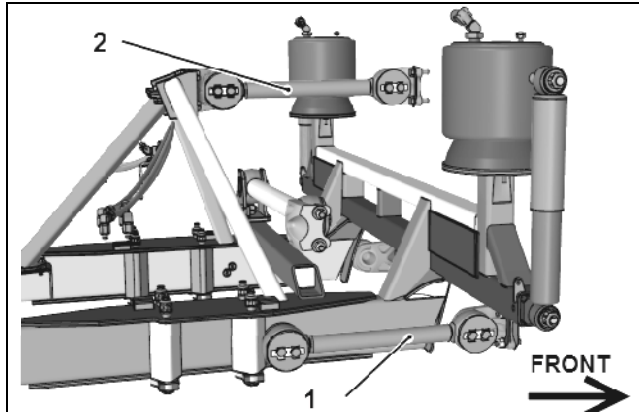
RADIUS RODS IDENTIFICATION – DRIVE AXLE SUBFRAME, CURBSIDE (DRIVE AXLE NOT SHOWN)
